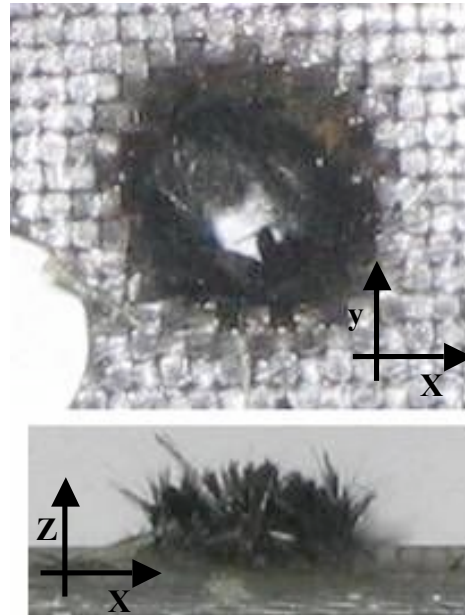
DEFECT IN HIGH-FEED DRILLING.
